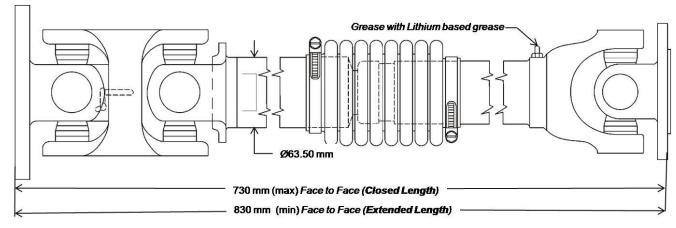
6x6 Centre Bearing to Rear Axle Prop Shaft – NIIN 66-128-5667 / LRA PNo: AYG7202
